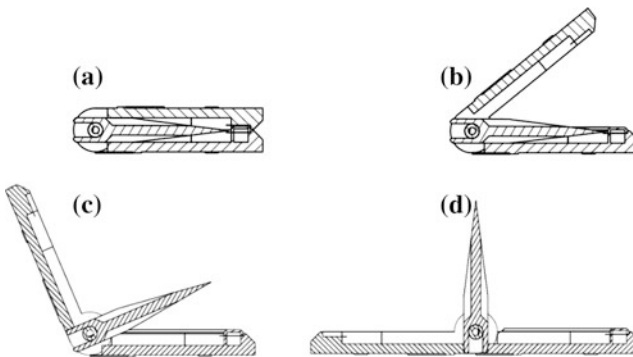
R-TPD demonstrator principle of operation: a closed state (motor idle), b opening phase (motor on), c opening phase and spike latching (motor on), d open state (motor set back to idle)
